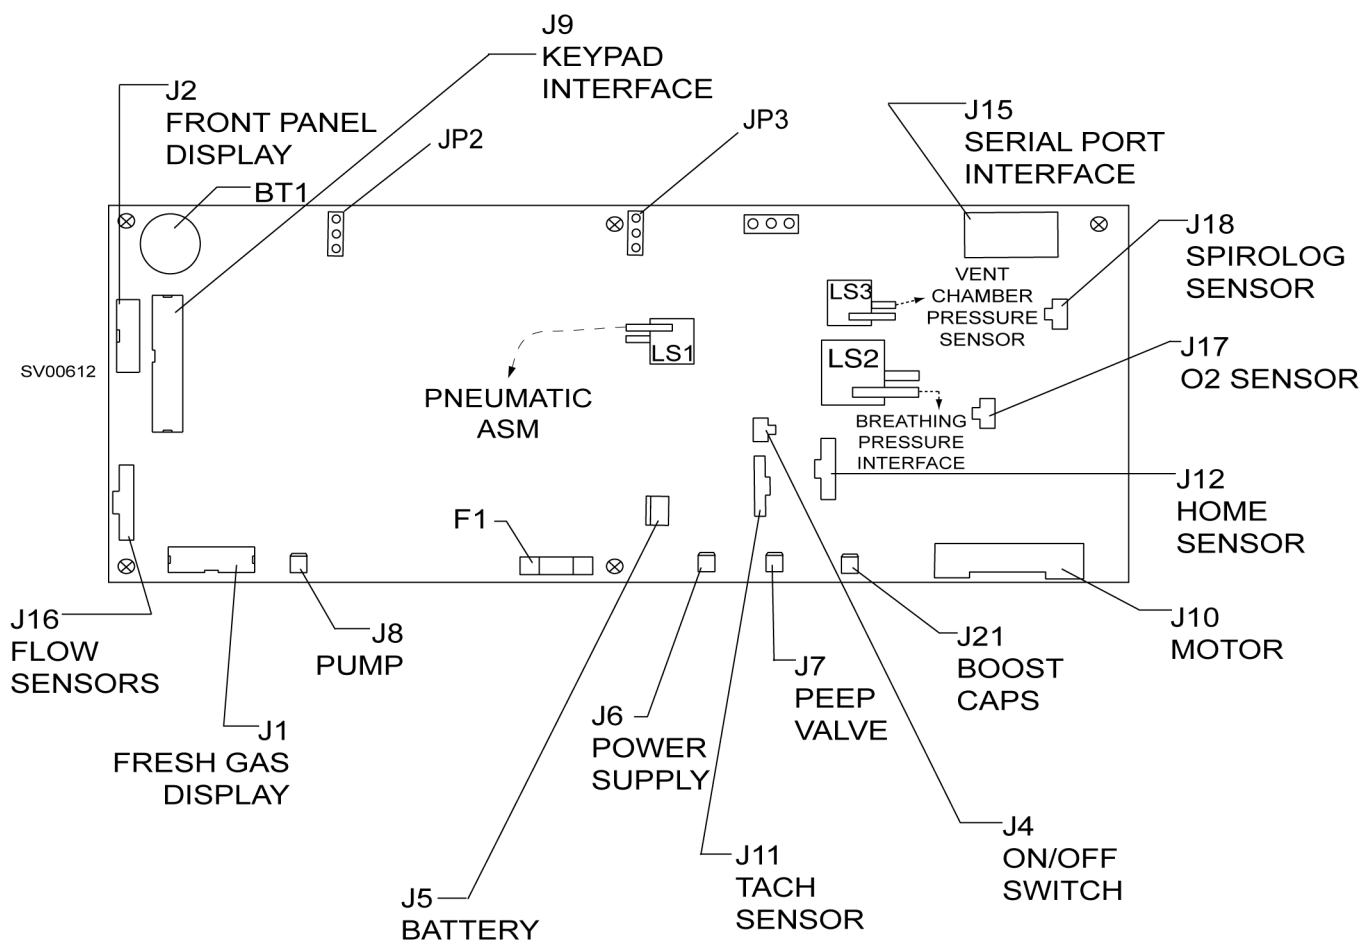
Main Controller PCB Connector Locations (P/N 4118079)
